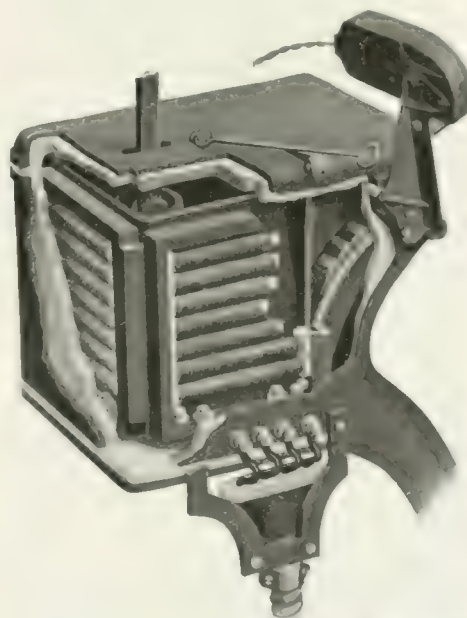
VIEW SHOWING CONSTRUCTION OF THE INTERIOR AND ARRANGEMENT OF WESTINGHOUSE HEATING ELEMENT
